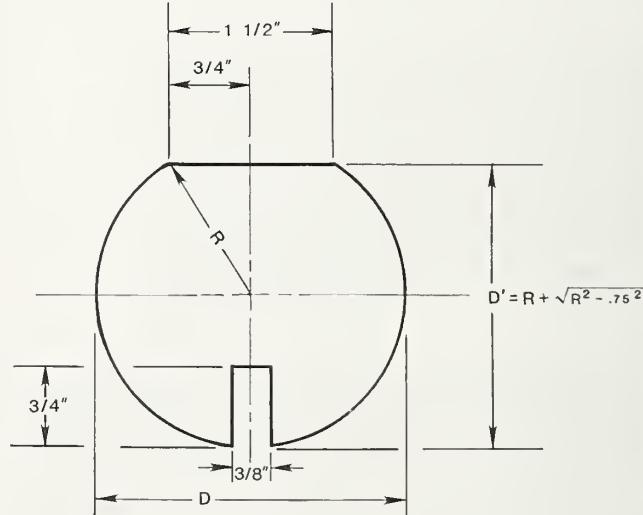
Diagram of dowel flanges for joists 9.5 and 11.875 inches deep in exploratory tests of joists given 2-point loading over a 24-foot span.
